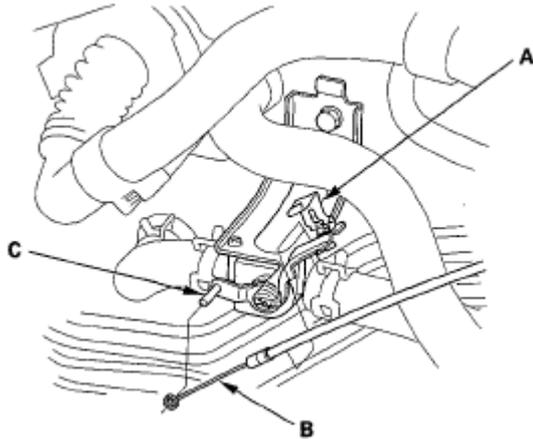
Identifying Cable Clamp, Heater Valve Cable And Heater Valve Arm
